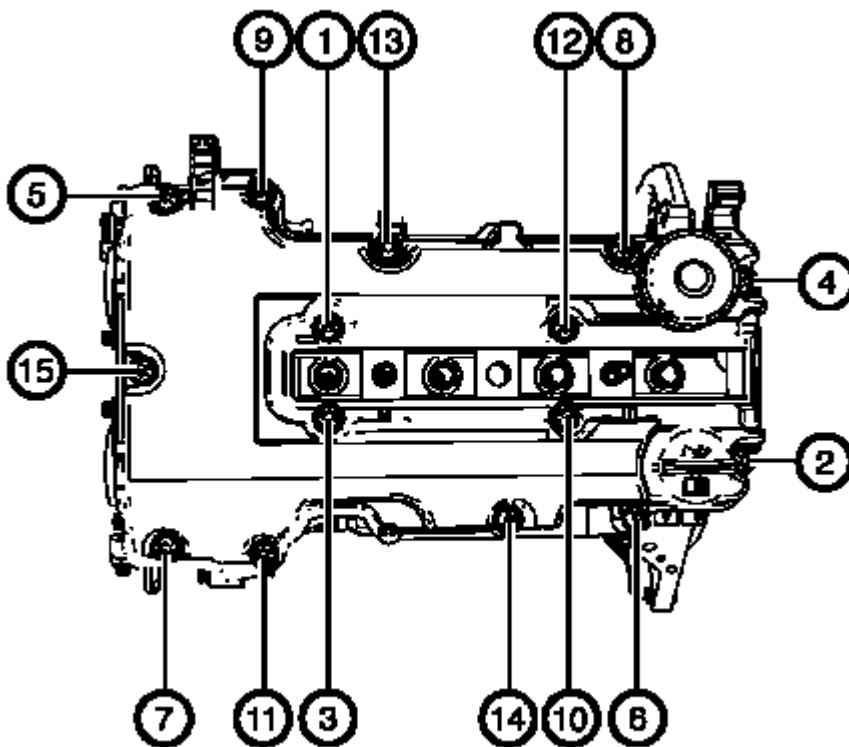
Camshaft Cover Bolts Tightening Sequence
